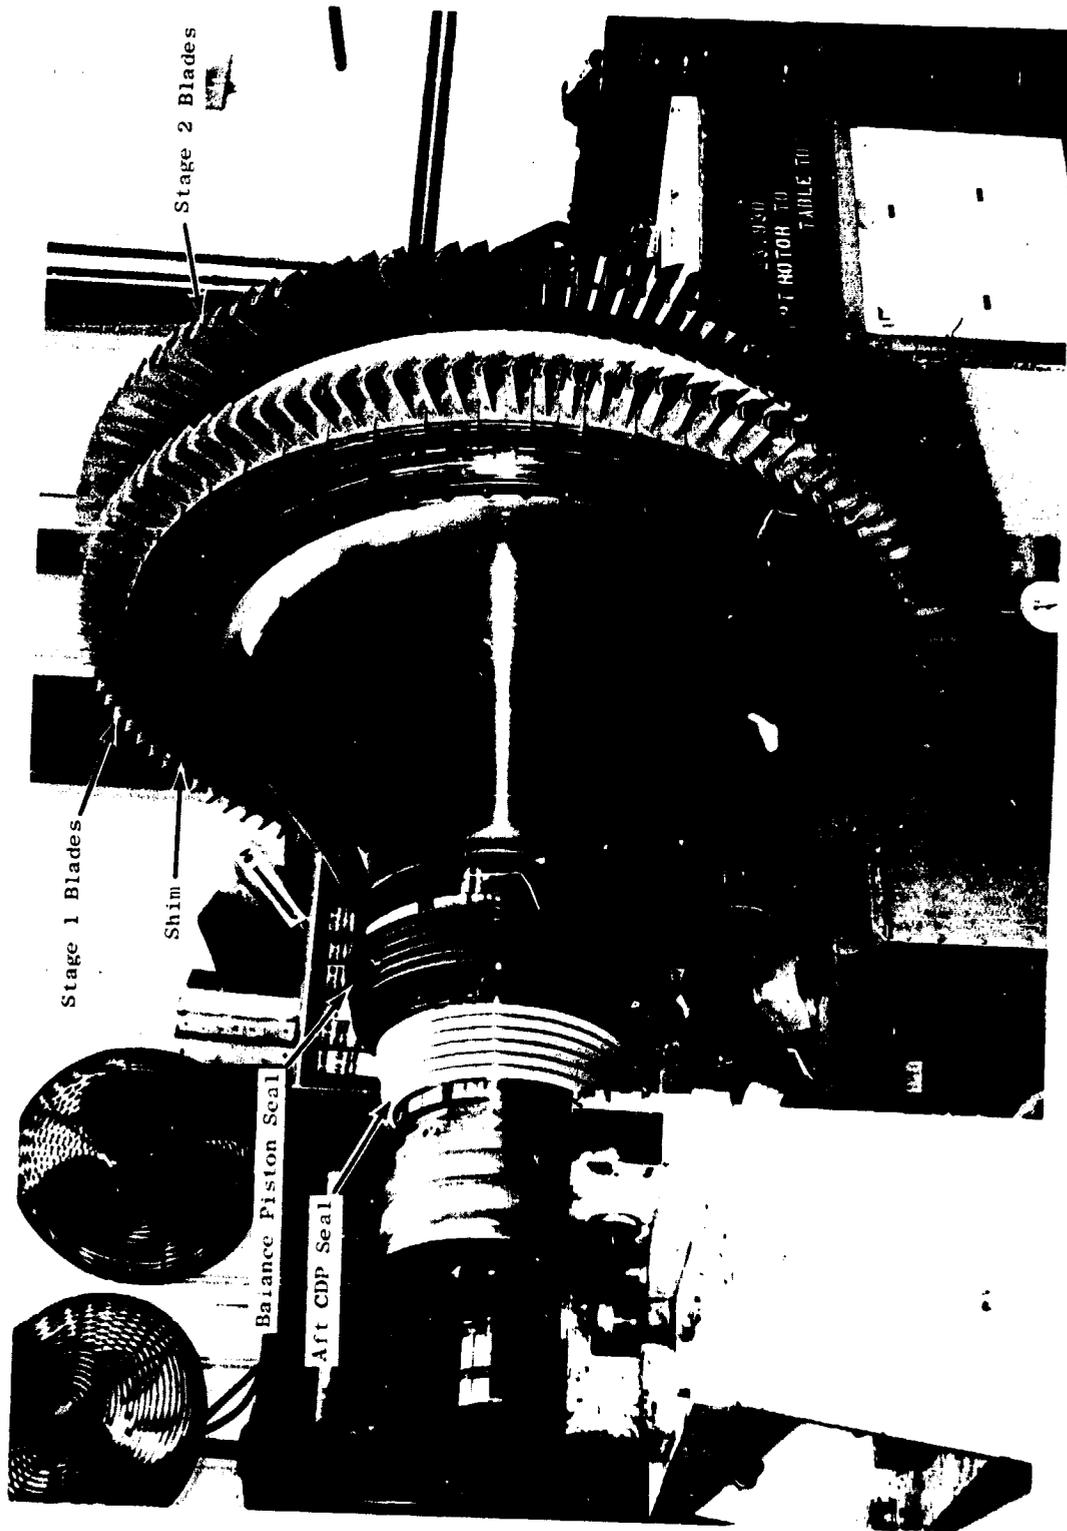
High Pressure Turbine Rotor in Runout Fixture.
